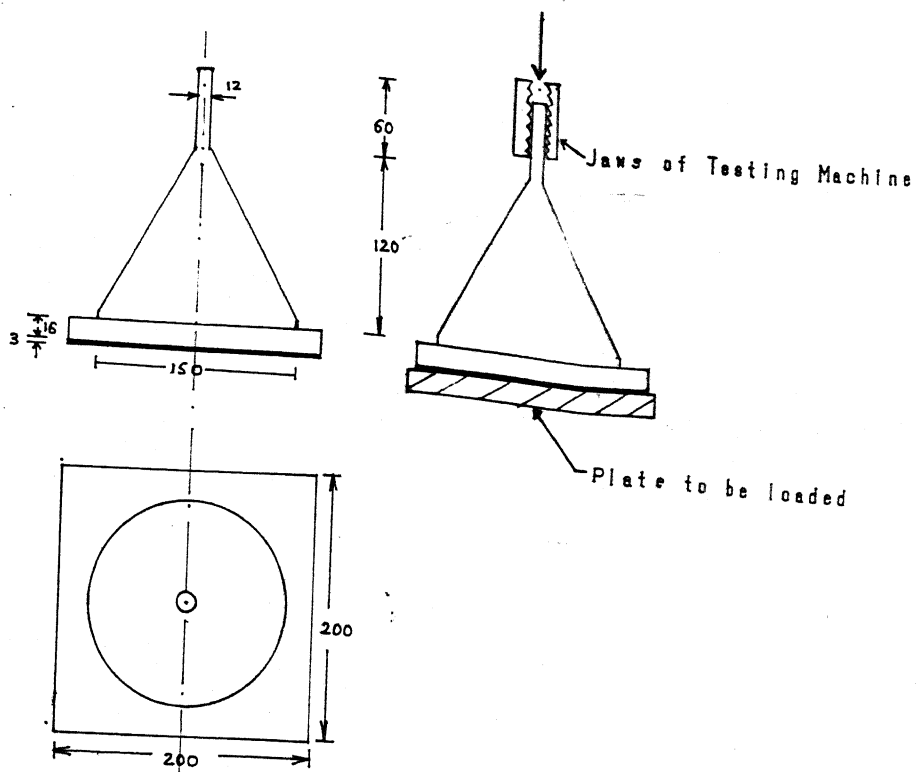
PLATE HOLDING FIXTURE ISOMETRIC VIEW
